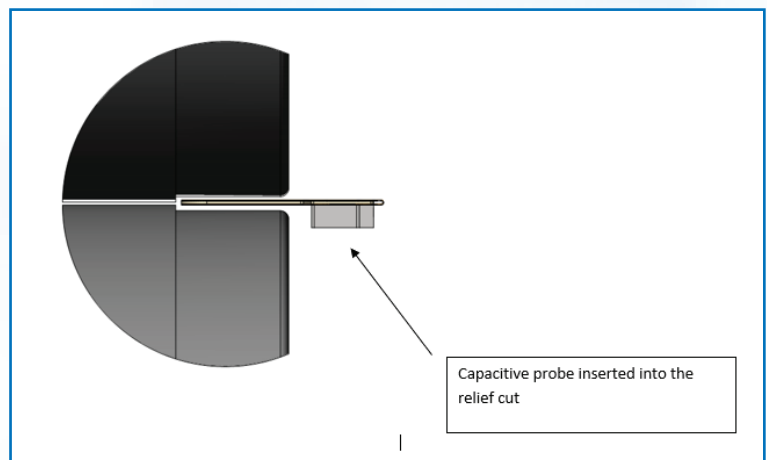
Exploded side view of relief cut on the edge of the rollers with the capacitive probe inserted.
